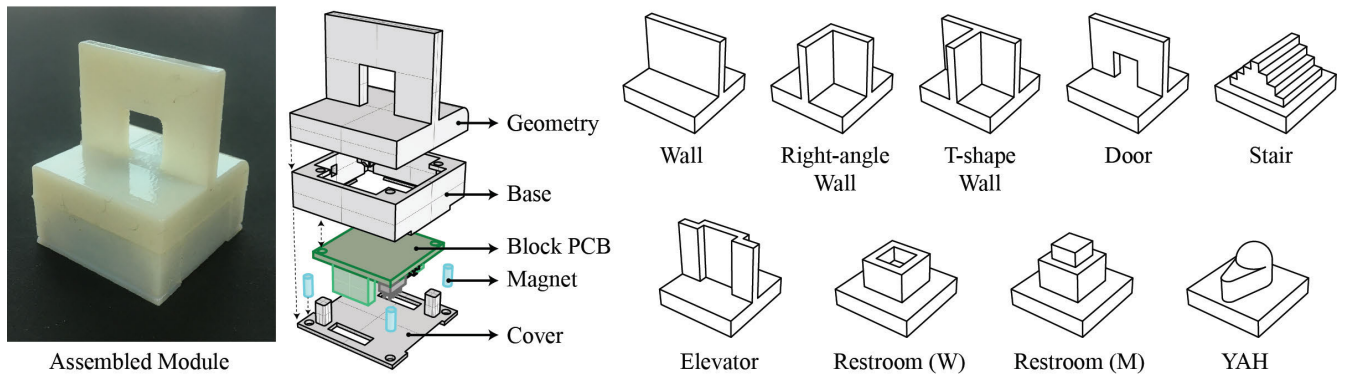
Assembled and each parts of block module and several types of modules having different shape respectively.
